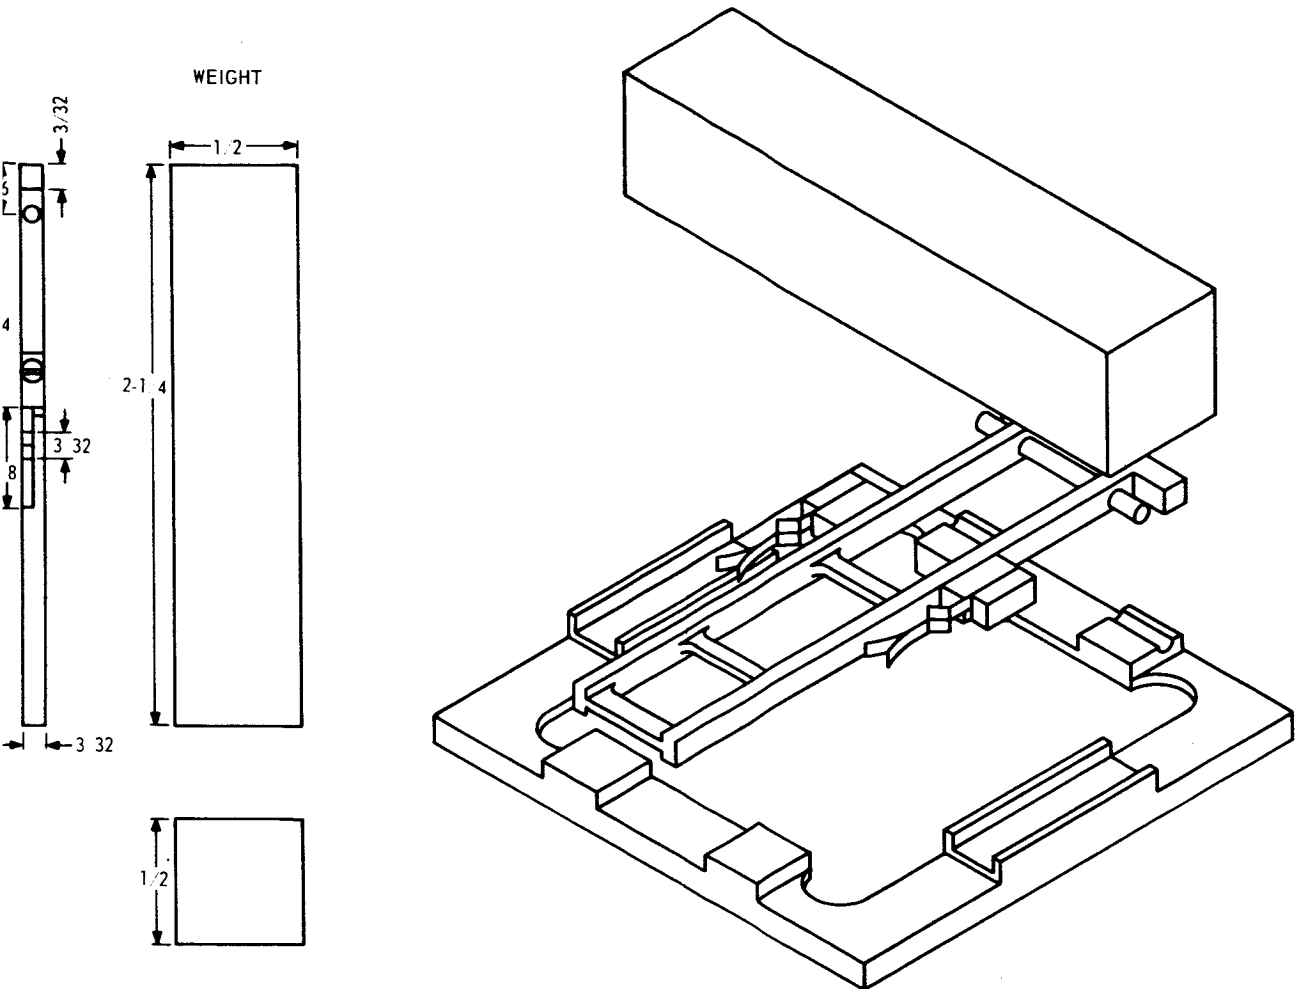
Assembly Jig, Thermoelectric Elements to Absorber Plate Subassemblies
